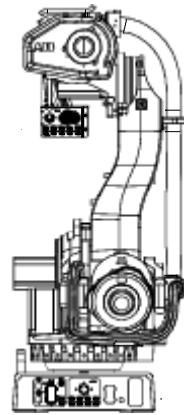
"Silver line" DressPack Lower rear side view Spot Welding version (interface axis 2/3 included).
